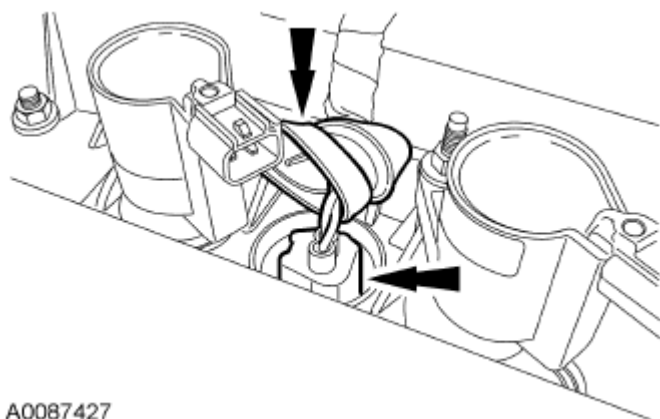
Locating Coil-On-Plugs And Camshaft Position Sensor Electrical Connectors
